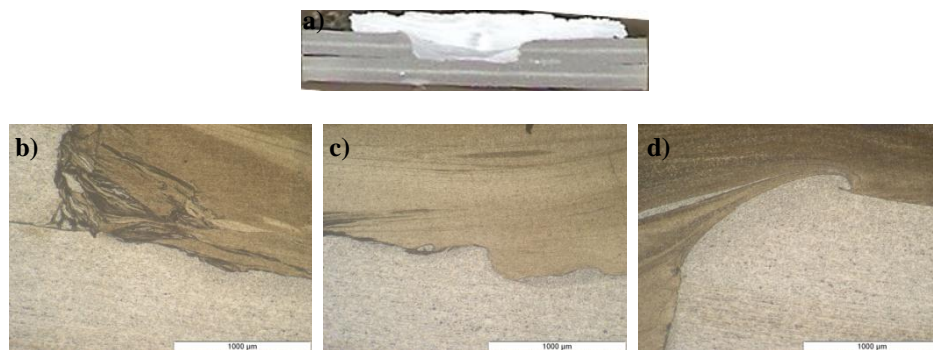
Microstructure of the samples welded by tool 2: a) macrography of the welded sample, b) bottom corner nugget joined with bottom and side surface, c) joint of nugget with bottom surface and d) top corner nugget near the upper surface.
